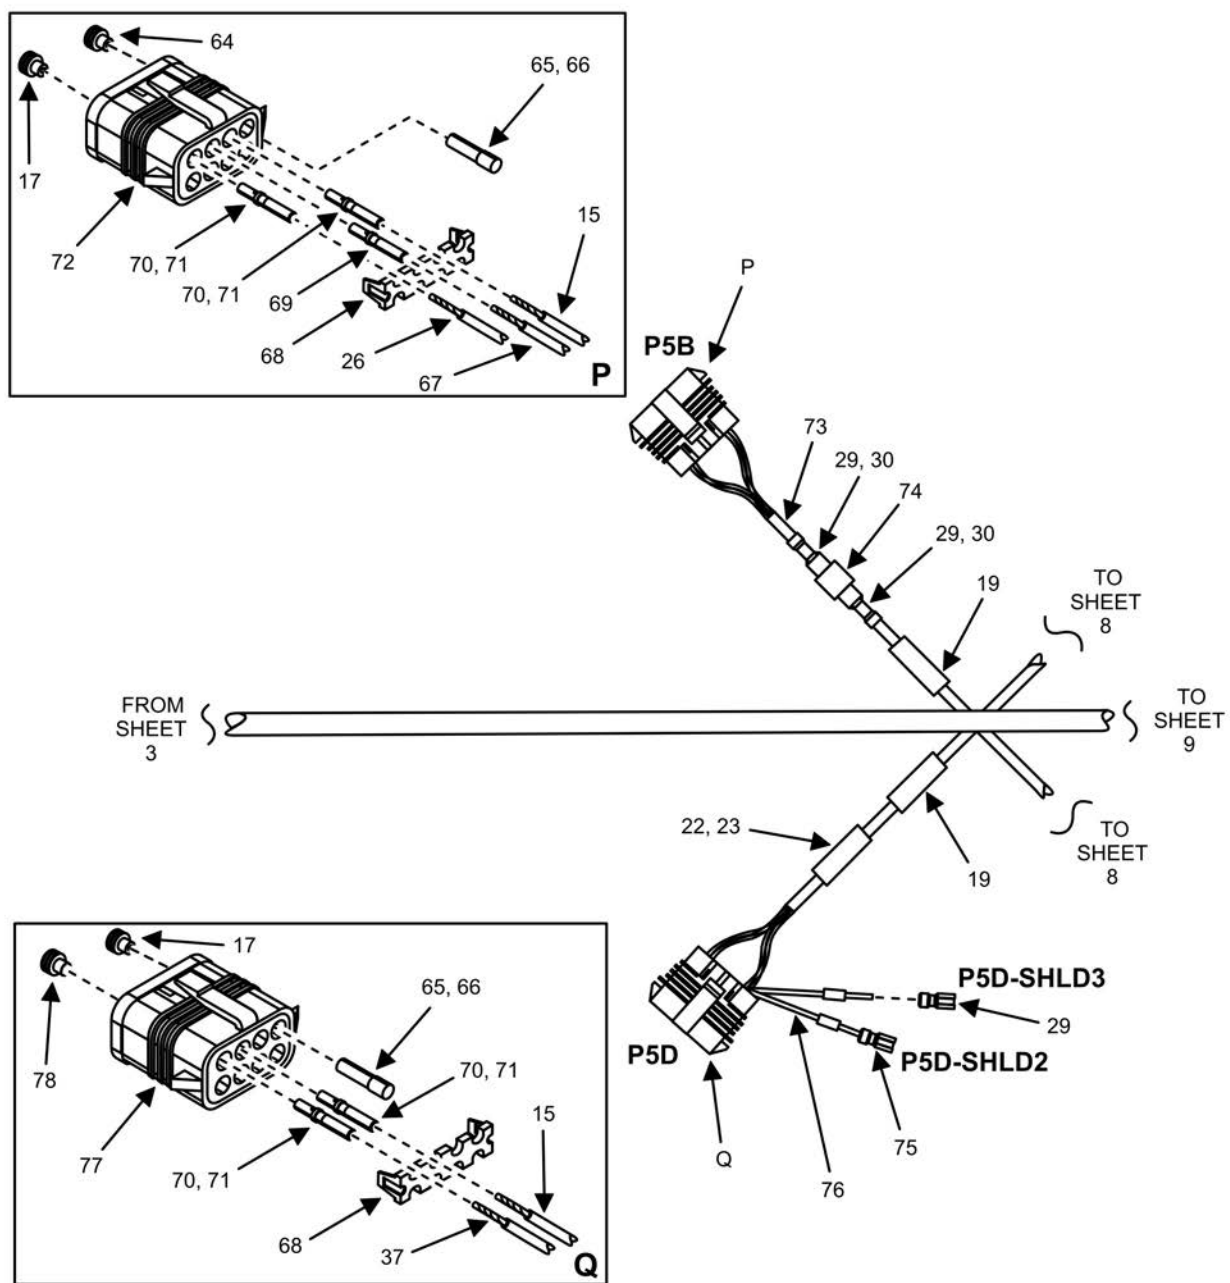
Engine Wiring Harness (Sheet 7 of 19).
